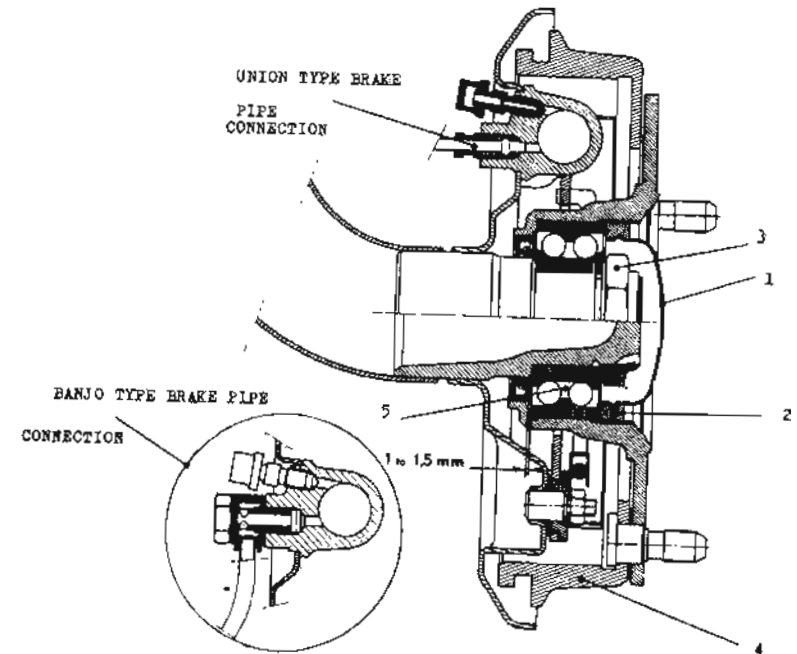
CROSS SECTION THROUGH REAR BRAKE DRUM AND HUB.
